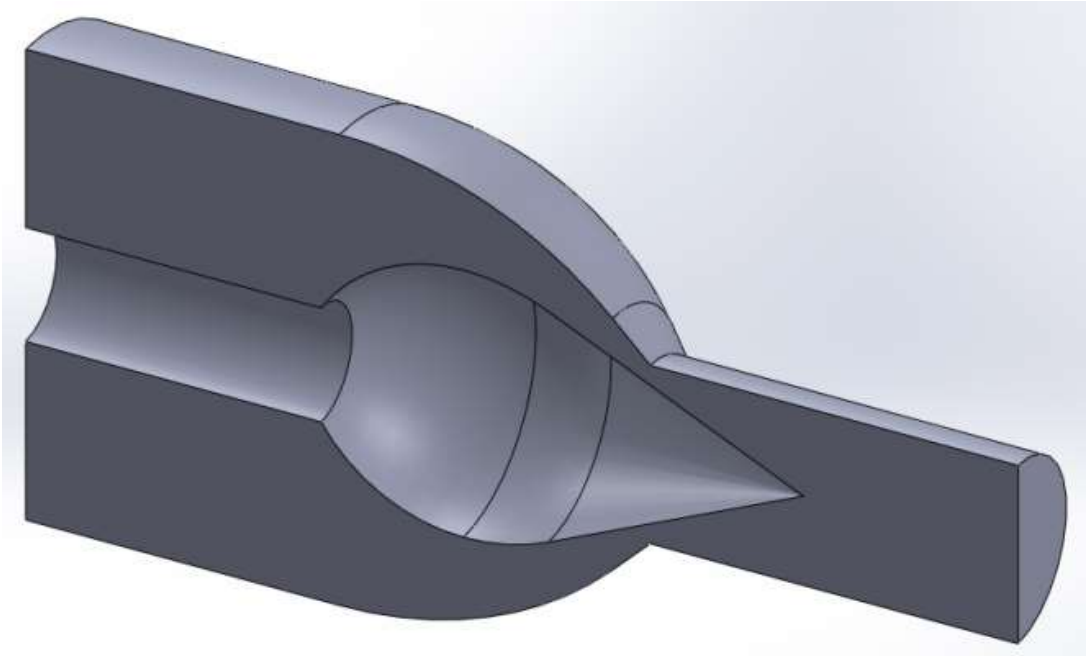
A section view of the Pelton turbine nozzle geometry.
